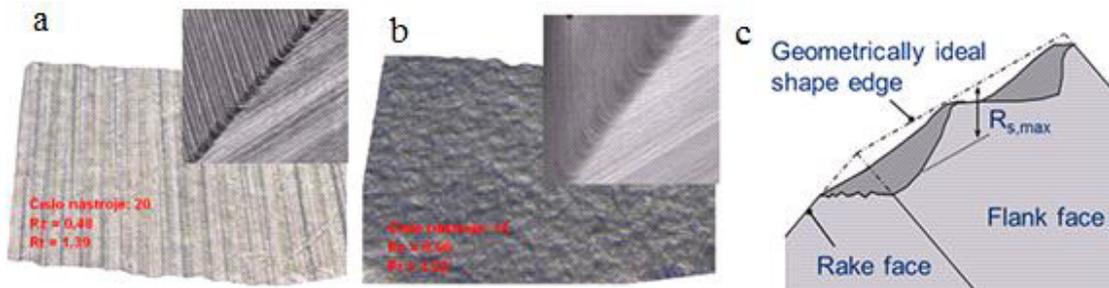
(a) Surface after grinding (on the left) (b) after drag finishing (in the middle); (c) Chipping – roughness of the cutting edge.
